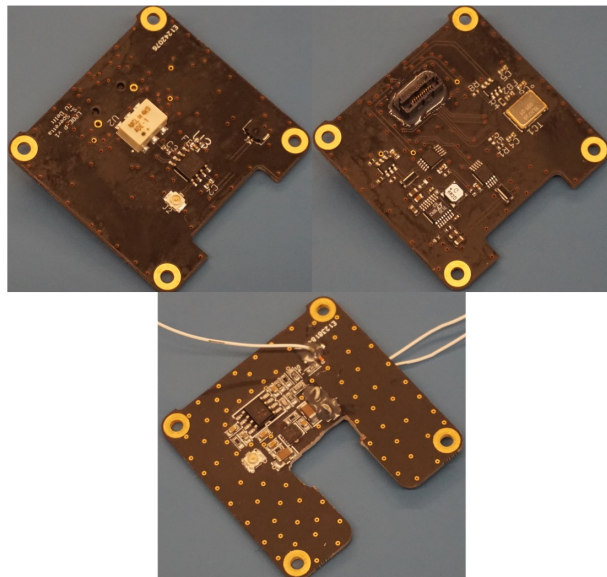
LNA mixer board (top) and LNA front-end (bottom).
